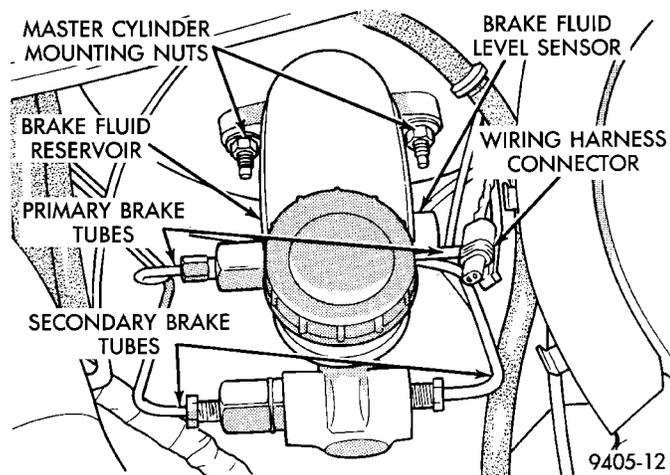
Primary And Secondary Brake Tubes W/O ABS Brakes
